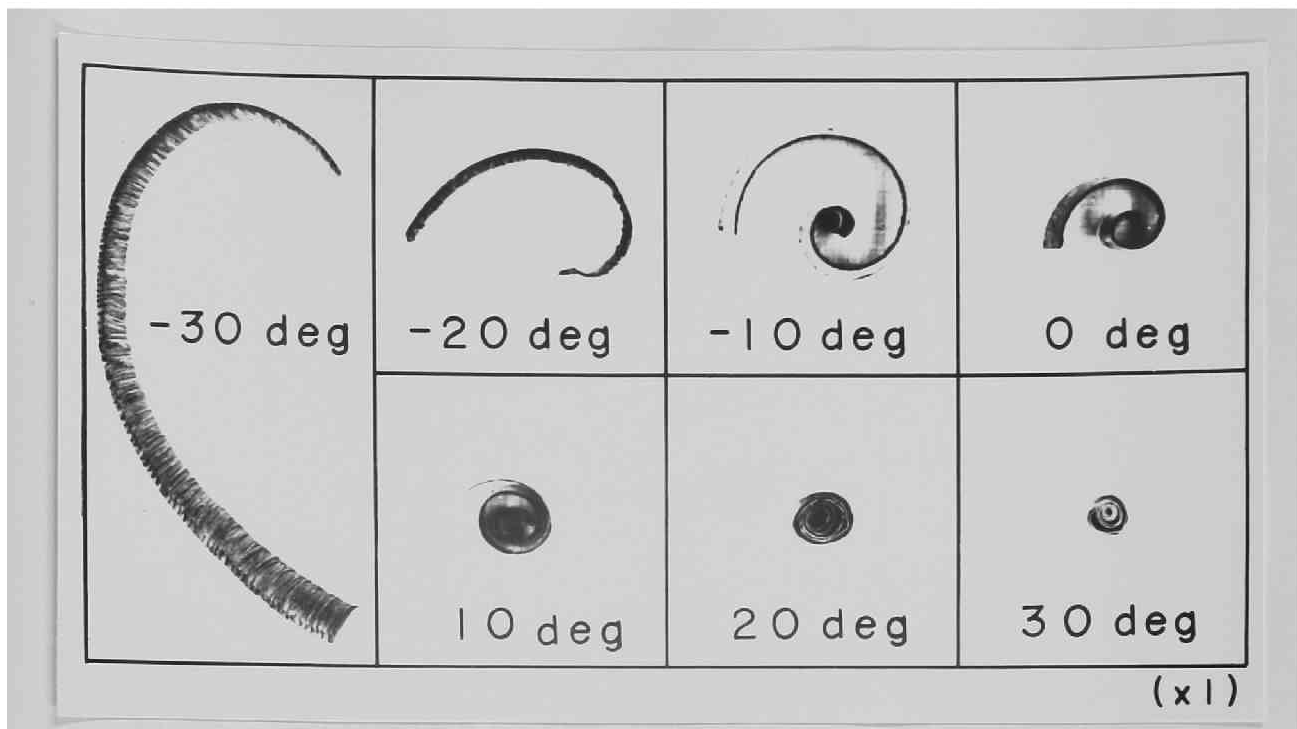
Photographs of chips obtained by orthogonal cutting of lead in relation to rake angle [Tool material, high-speed steel SKH 2(18-4-1); clearance angle, 6 deg; width of cut, 6.0 mm; depth of cut, 0.10 mm; cutting speed, 9 m/min; dry]
